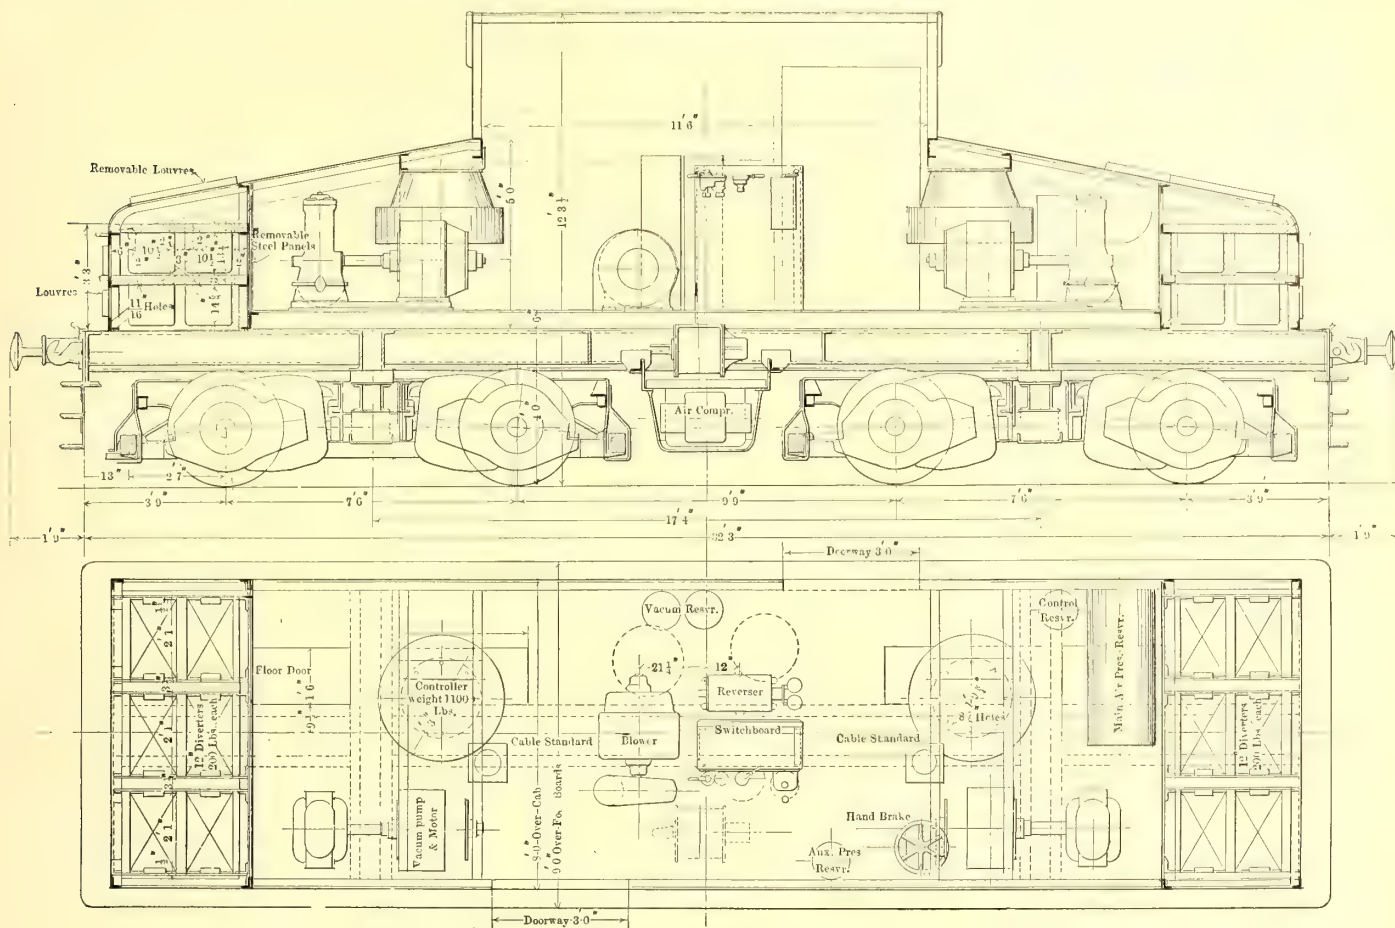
DIMENSIONED DRAWING OF METROPOLITAN ELECTRIC LOCOMOTIVE, SHOWING ALSO PLAN, ARRANGEMENT OF MACHINERY, ETC.
